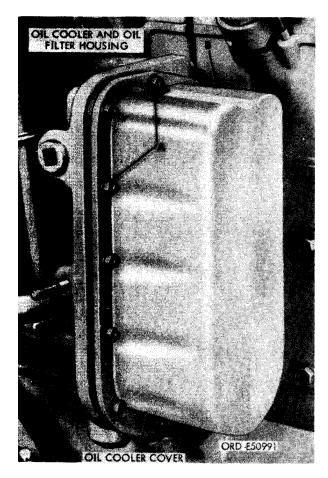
REMOVING OR INSTALLING OIL COOLER COVER.
